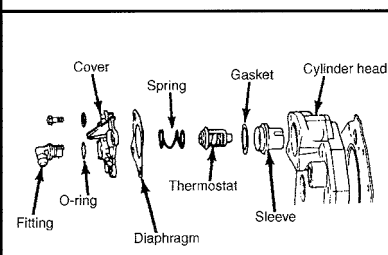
Exploded view of the thermostat assembly-carbureted 185-250 hp (3000cc) 90LV6 motors
